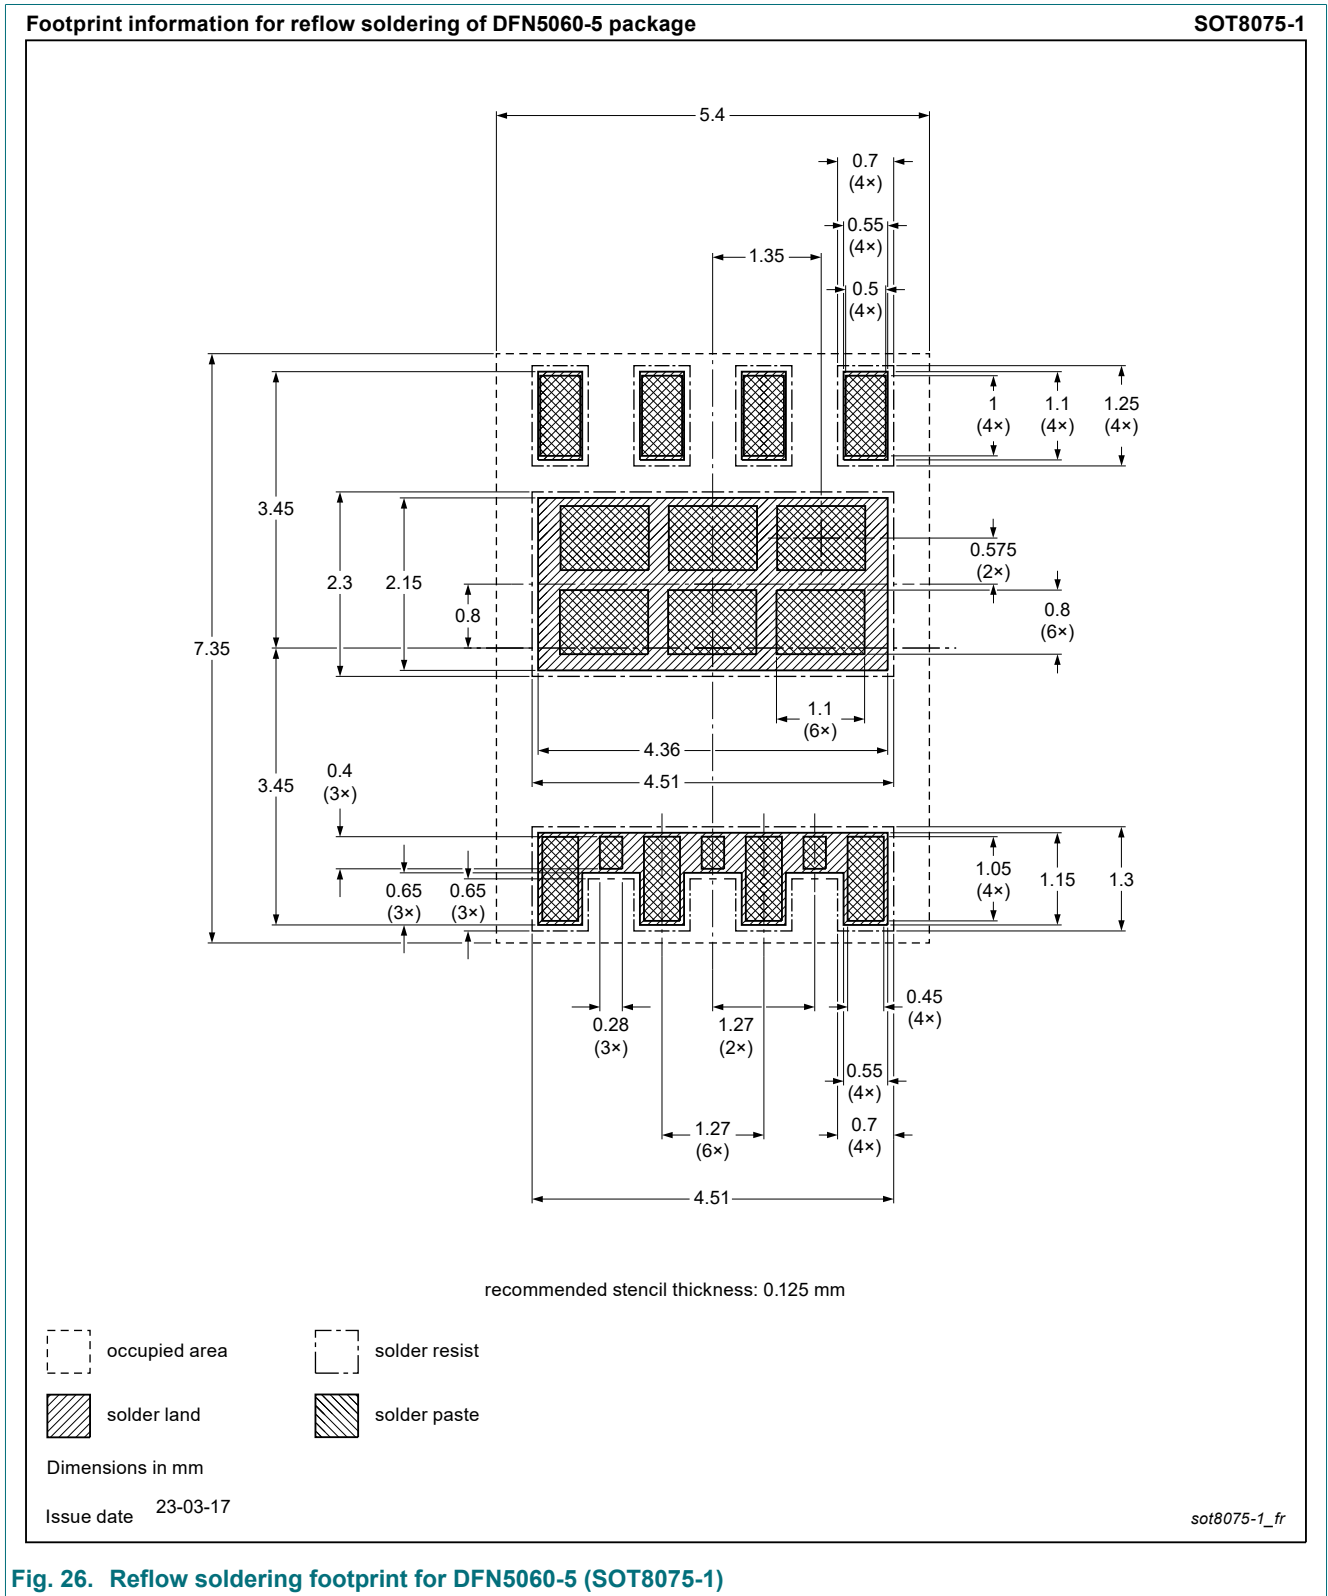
Reflow soldering footprint for DFN5060-5 (SOT8075-1)
